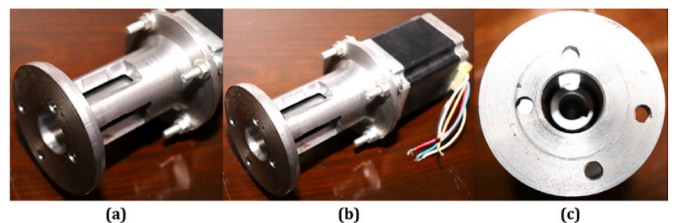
Jig designed to hang motor. (b) Jig attached with motor and Shaft Coupling.
